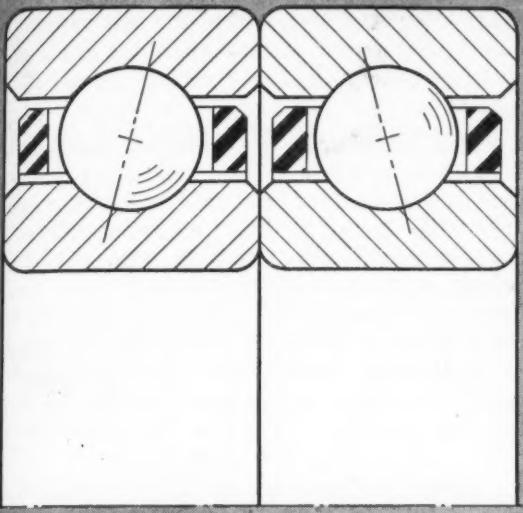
Two bearings of type shown in Fig. 1, single-row, deep-groove, arranged as duplex pair back-to-back or DB preload
